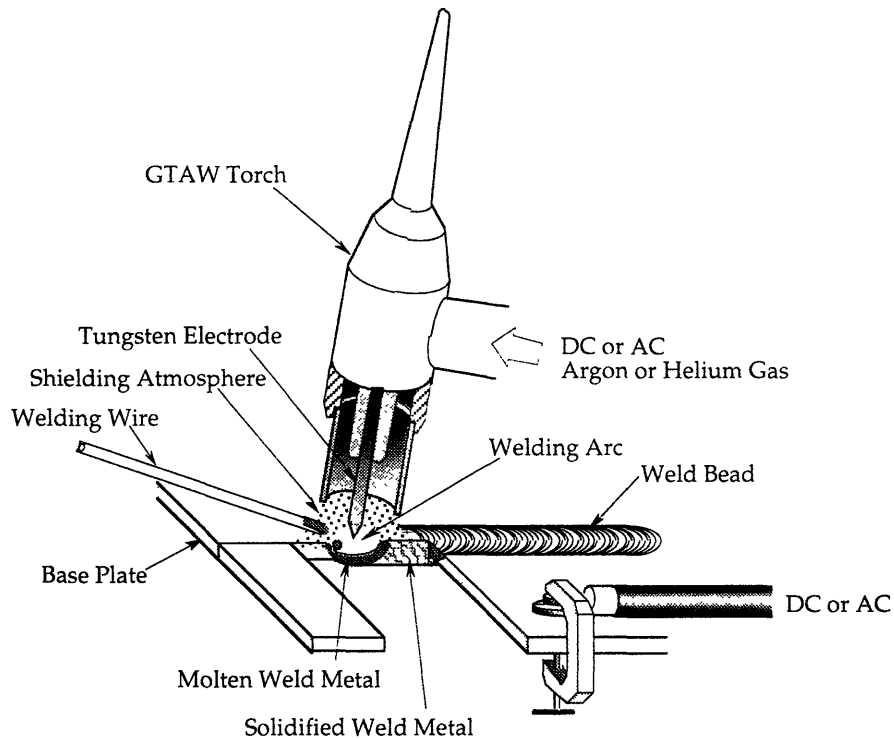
Gas tungsten arc welding operation and torch assembly
